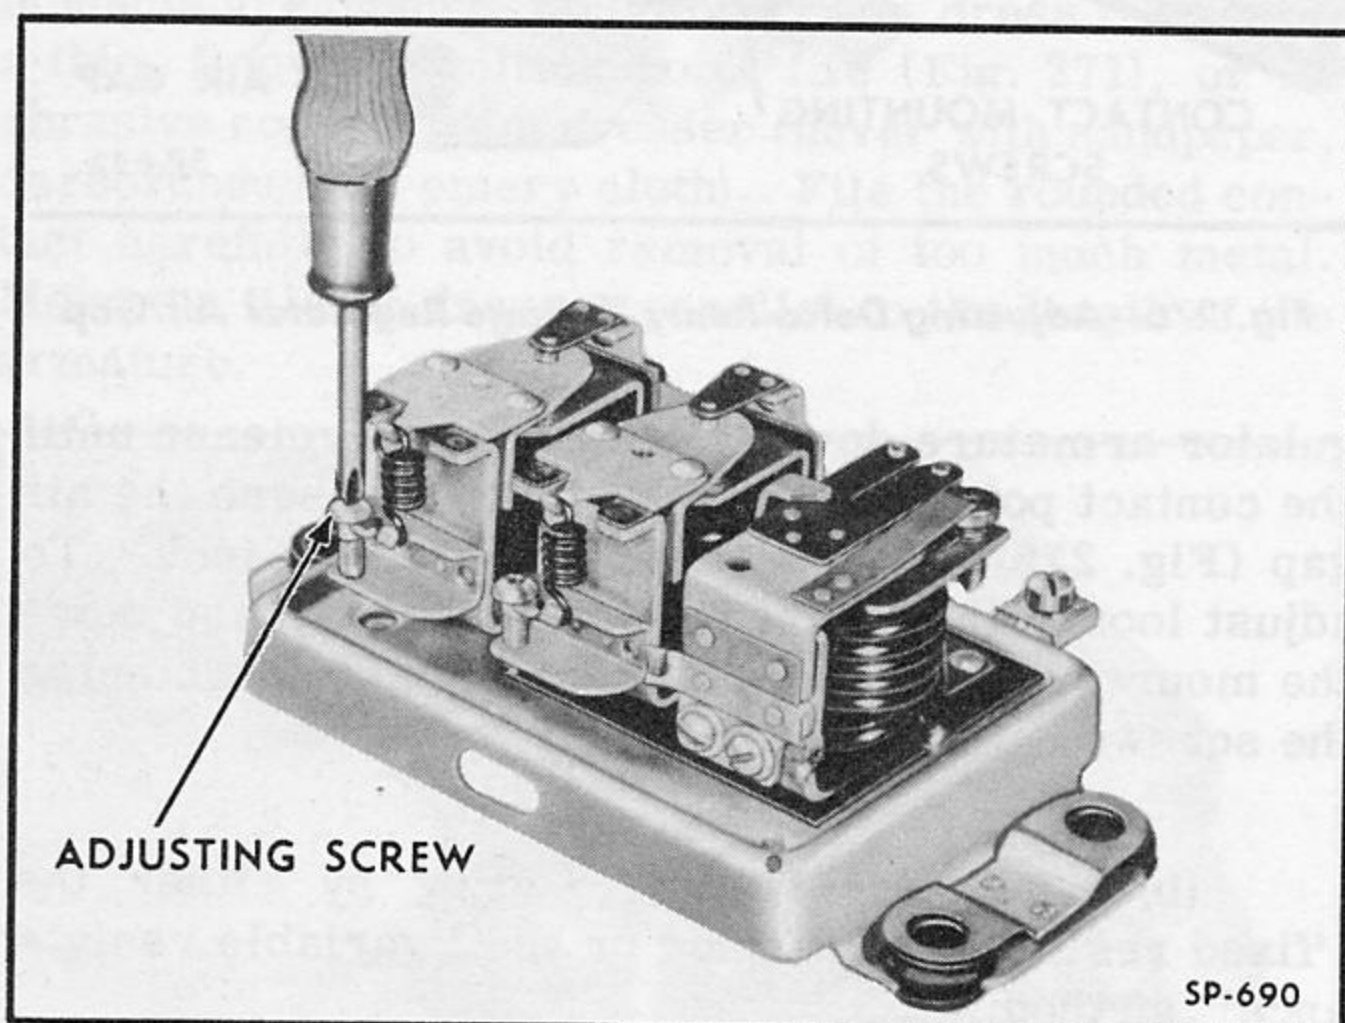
Adjusting Delco-Remy Voltage Regulator Setting
